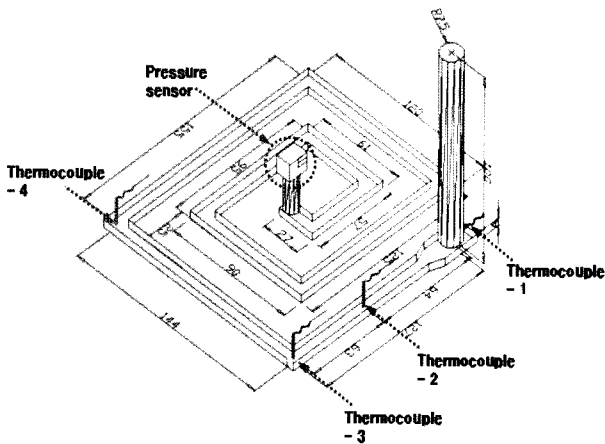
A schematic drawing of the pattern for fluidity test in vacuum molding process.
